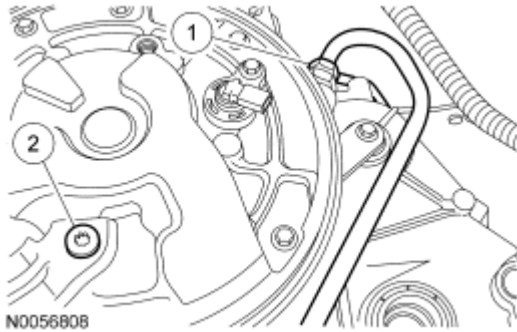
Identifying Fluid Cooler Tube And Bolt
